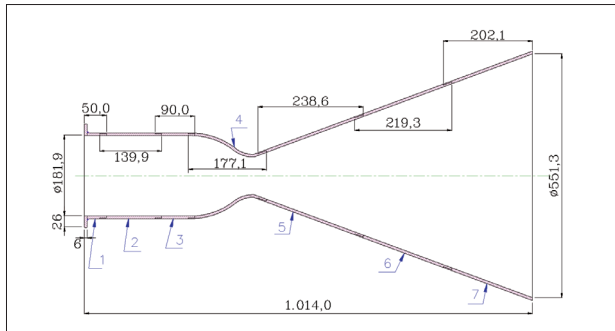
Dimensions of the segmented combustion chamber in millimeters.
